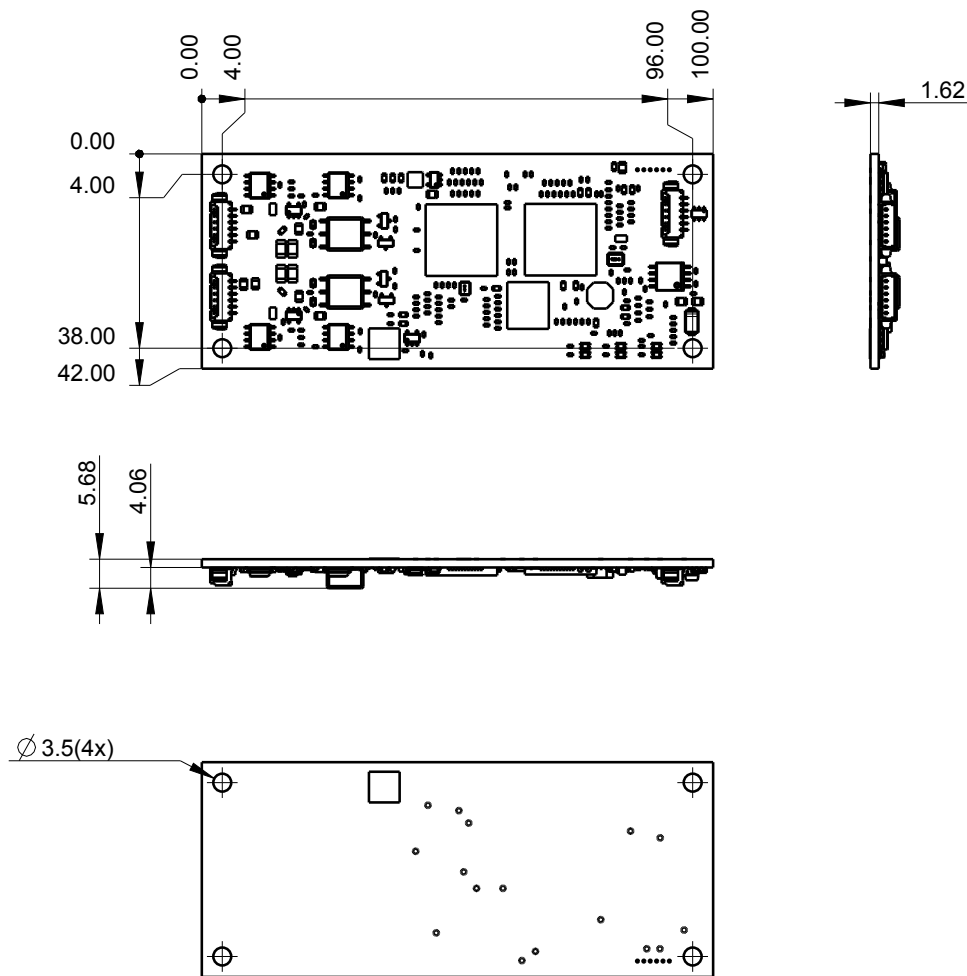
Physical dimensions of Kvaser USBcan Pro 2xHS v2 CB.
